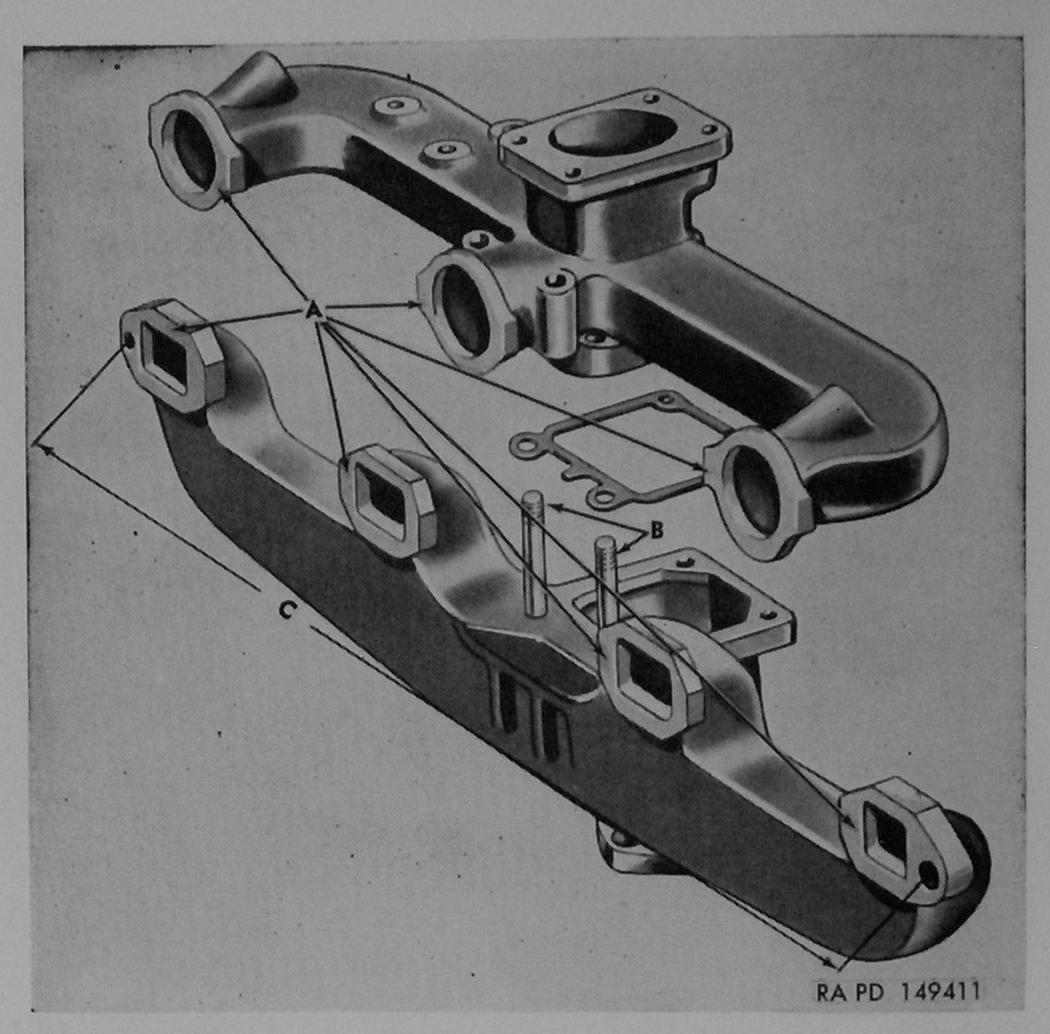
Repair and rebuild standard points of measurement for intake and exhaust manifolds (engine assemblies 7411599 and 8329440).
